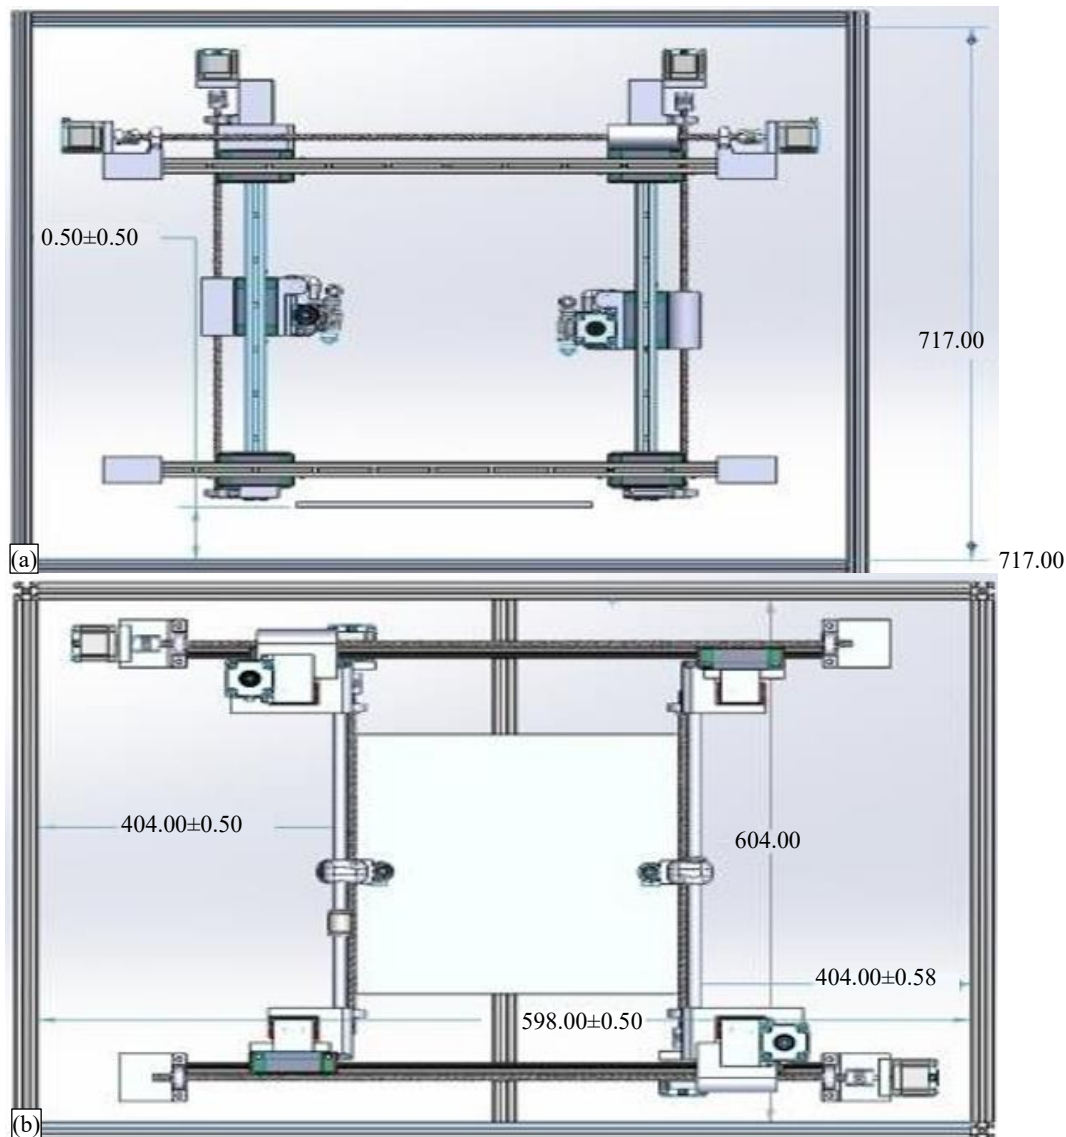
(a) Front view and (b) top view of 3D printing machine.
